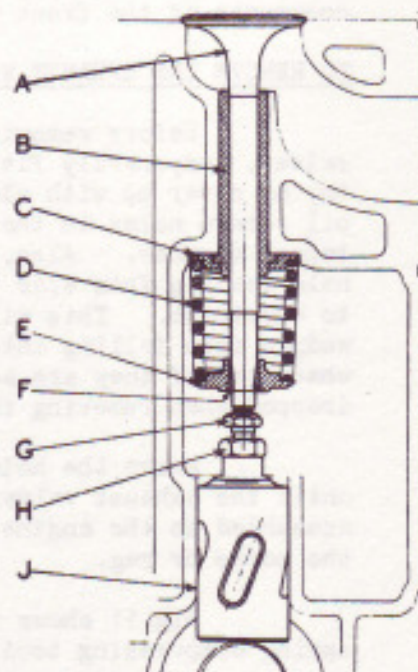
ARRANGEMENT OF EXHAUST VALVE WITH BRONZE GUIDE.
